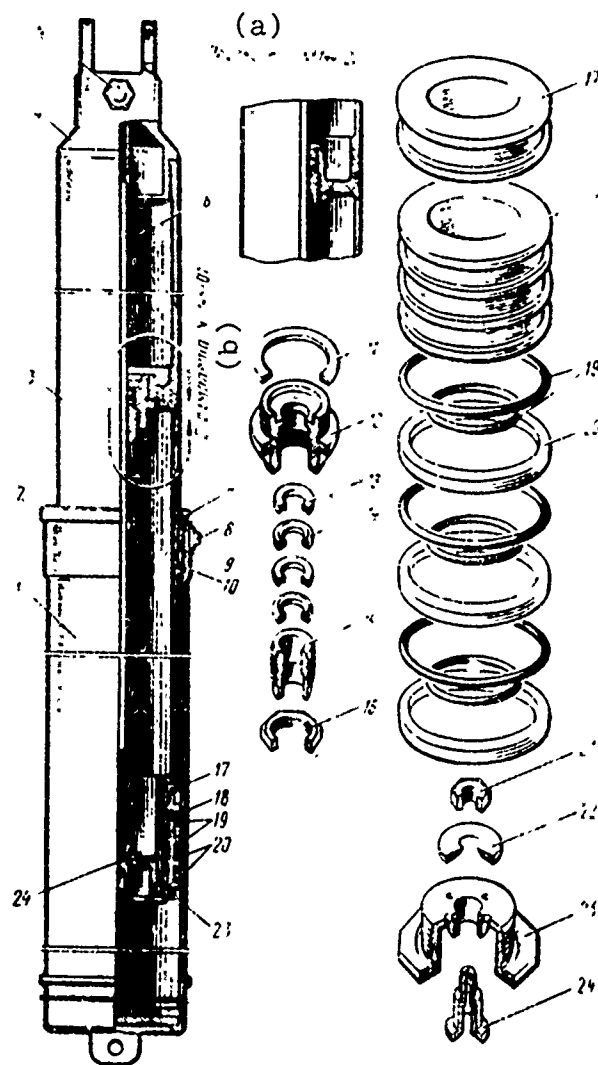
Landing gear shock absorber: 1 - cylinder; 2 - upper sleeve; 3 - rod; 4 - rod base; 5 - charging valve; 6 - filling tube; 7 - felt ring; 8 - screw; 9 - groove for graphite lubrication; 10, 11 - fiber gasket; 12 - nut; 13 - rubber seal; 14 - shaped washer; 15 - guide bush; 16 - lock nut; 17 - duralumin spacing ring; 18 - lower bronze sleeve; 19 - rubber ring; 20 - leather ring; 21 - attachment nut of valve washer; 22 - duralumin valve washer; 23 - valve nut; 24 - hollow valve (diffuser) bolt.
